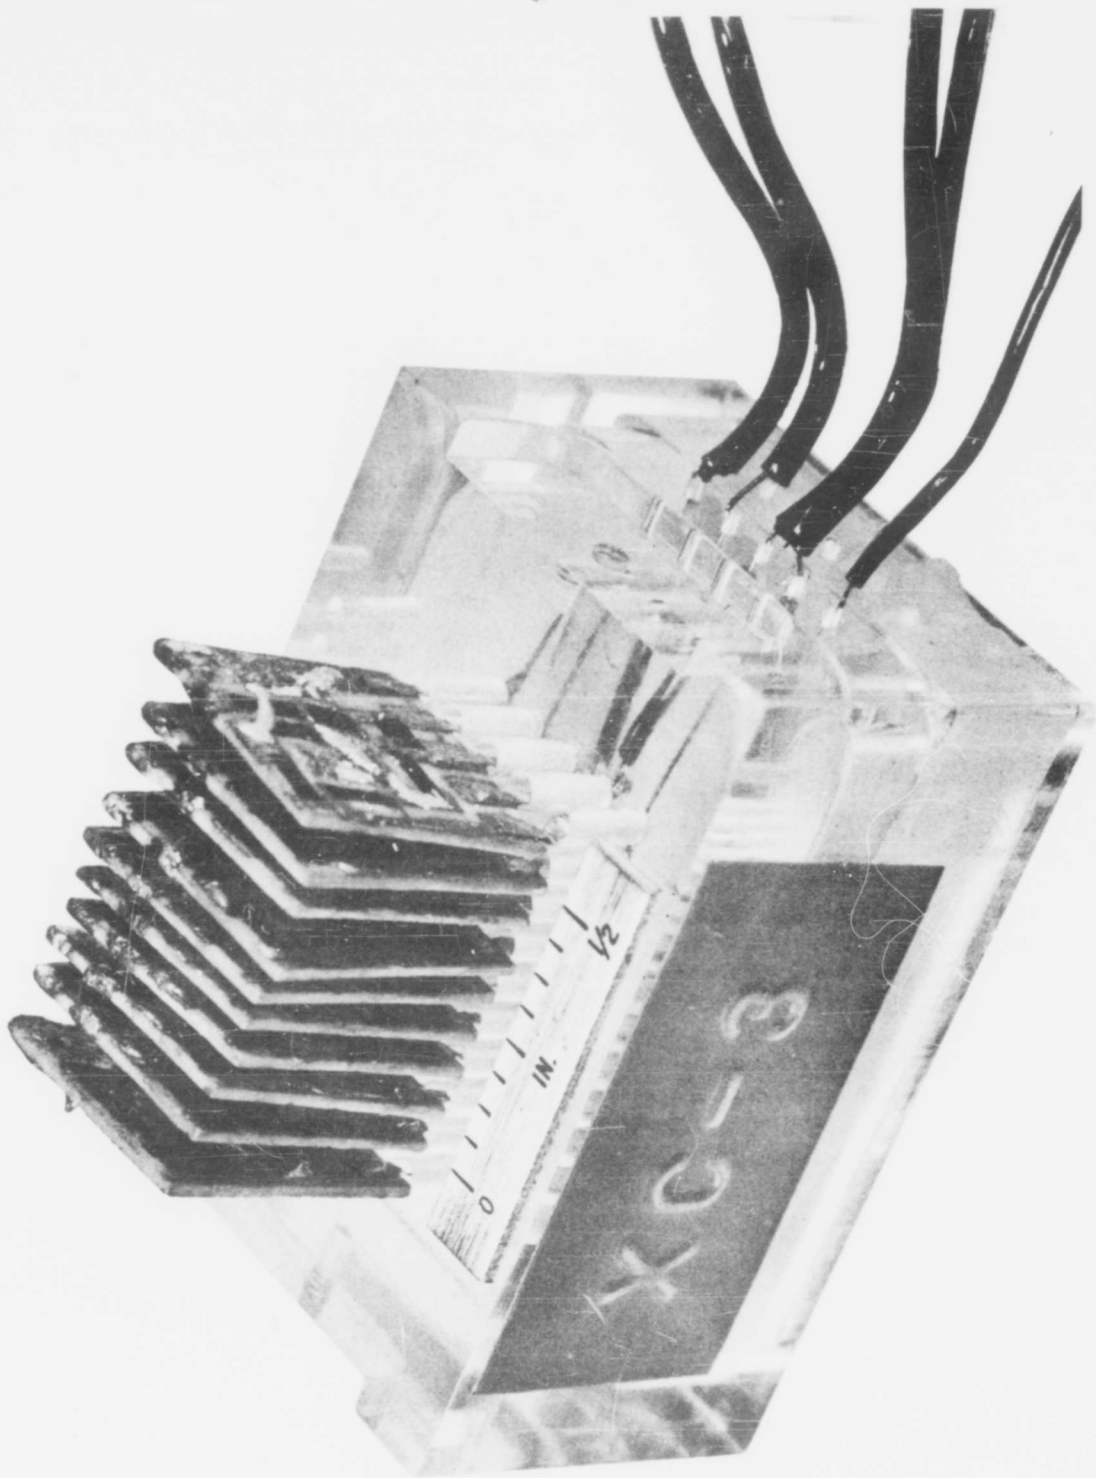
First structure employed in assembling binary counters using welding techniques allowed 1/2-inch of lead length to remain on each wafer.
